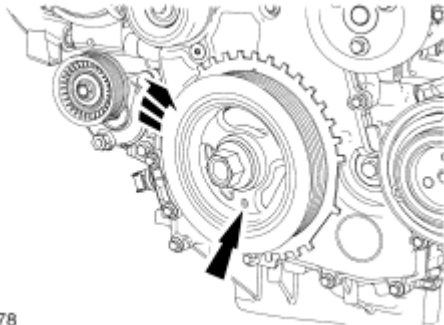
Identifying Hole In Crankshaft Pulley In 6 O'Clock Position
